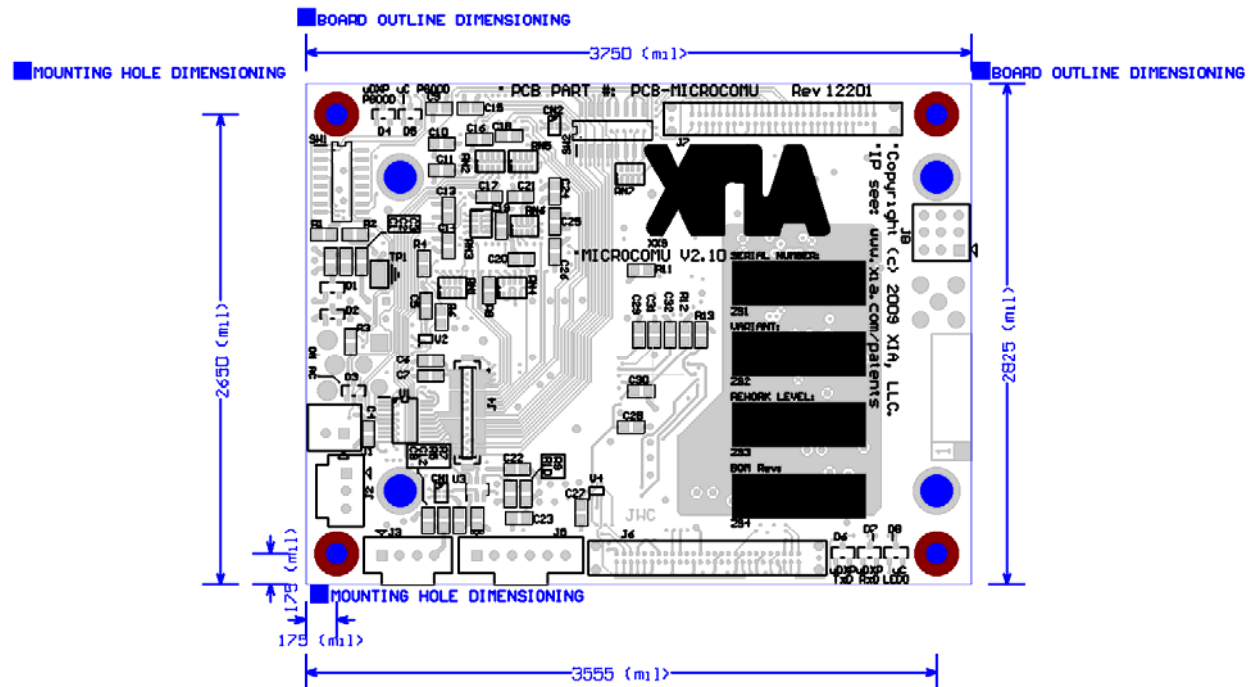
Board outline dimensions and locations of customer-accessible mounting holes (the 4 shown in red nearest the corners of the board). Dimensions and locations are given in mil, where 1 mil = 1/1000 inch, or 1 mil = 0.0254 mm. Note: The inner 4 mounting holes (in gray and blue) are reserved for use by the mated MicroDXP board only. (There are 5 mm spacers installed in these mounting holes to support the mounted MicroDXP).
